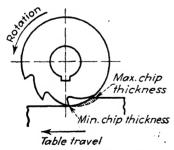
Milling against the feed-called "conventional," "up," or "out" milling.
